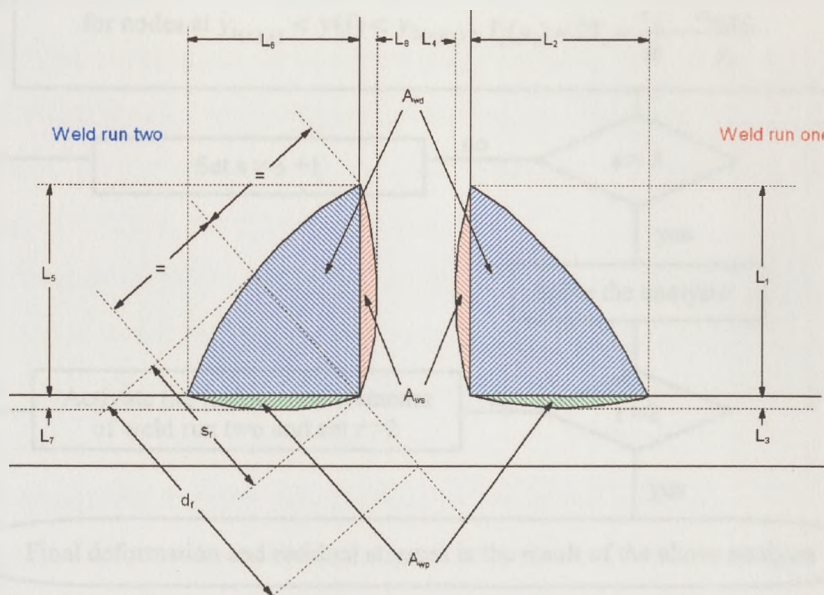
Cross-section of double-sided fillet weld
